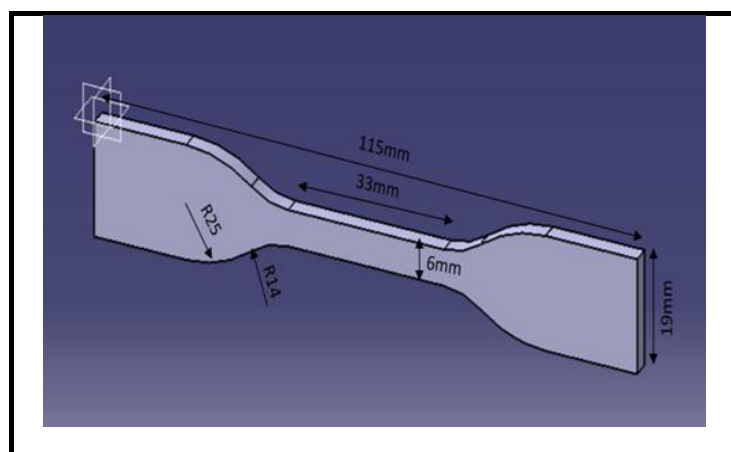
Dimension Of The Test Specimen Used For AP/Sorbitol Solid Propellant
